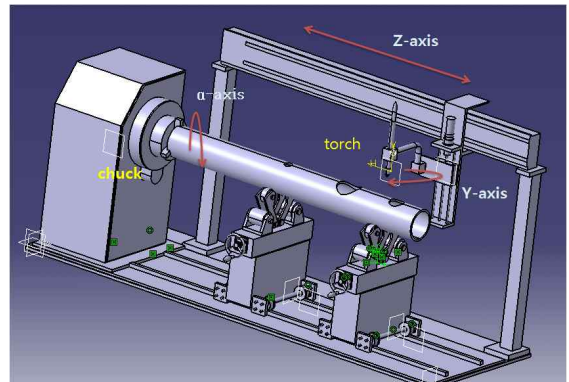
Automatic Pipe Profiling Cutting M/C 3D Modeling
